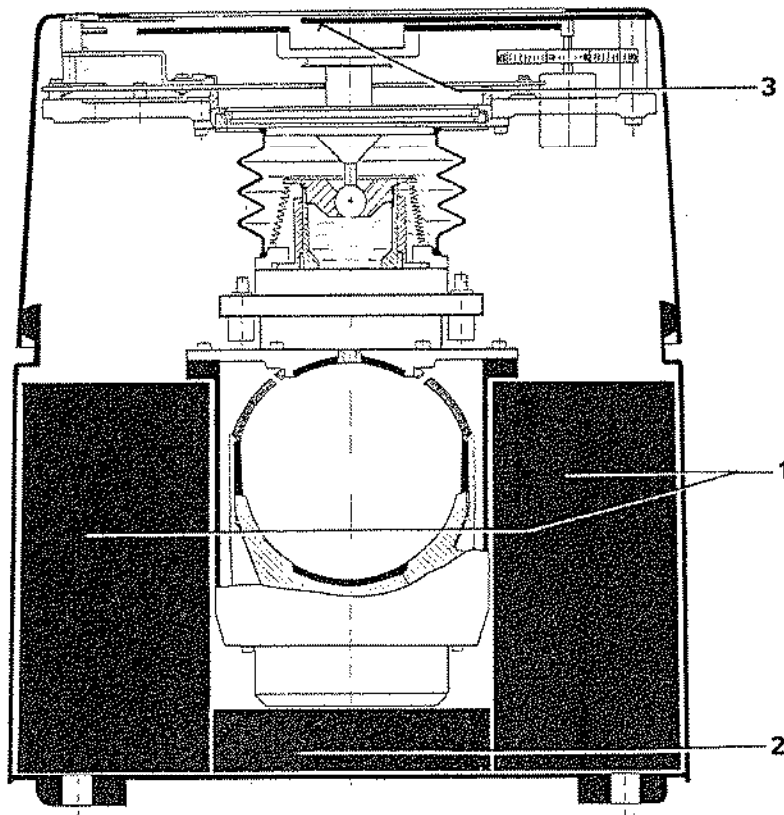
Transportation Supports (Schematic Sectional Drawing)
